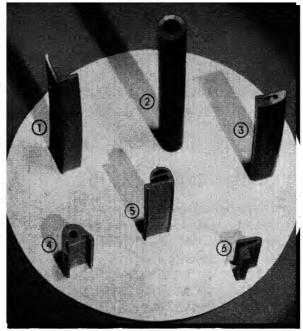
Complicated plastic or rubber extrusions can be duplicated in Koroseal compounds. Some simple forms are (1) protective angle strip, (2) beverage tubing, (3) bumper strip for a vacuum cleaner, (4) decorative molding for train coaches, (5) refrigerator-door gasket, and (6) metal-panel sealing strip.
